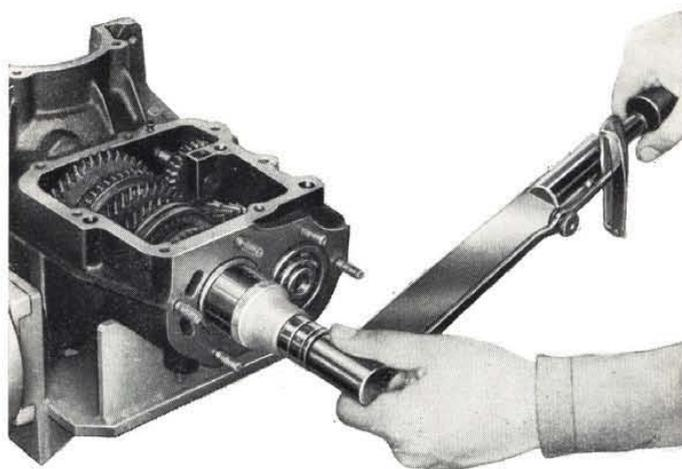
Using torque wrench to tighten the countershaft-drive pinion nut.
